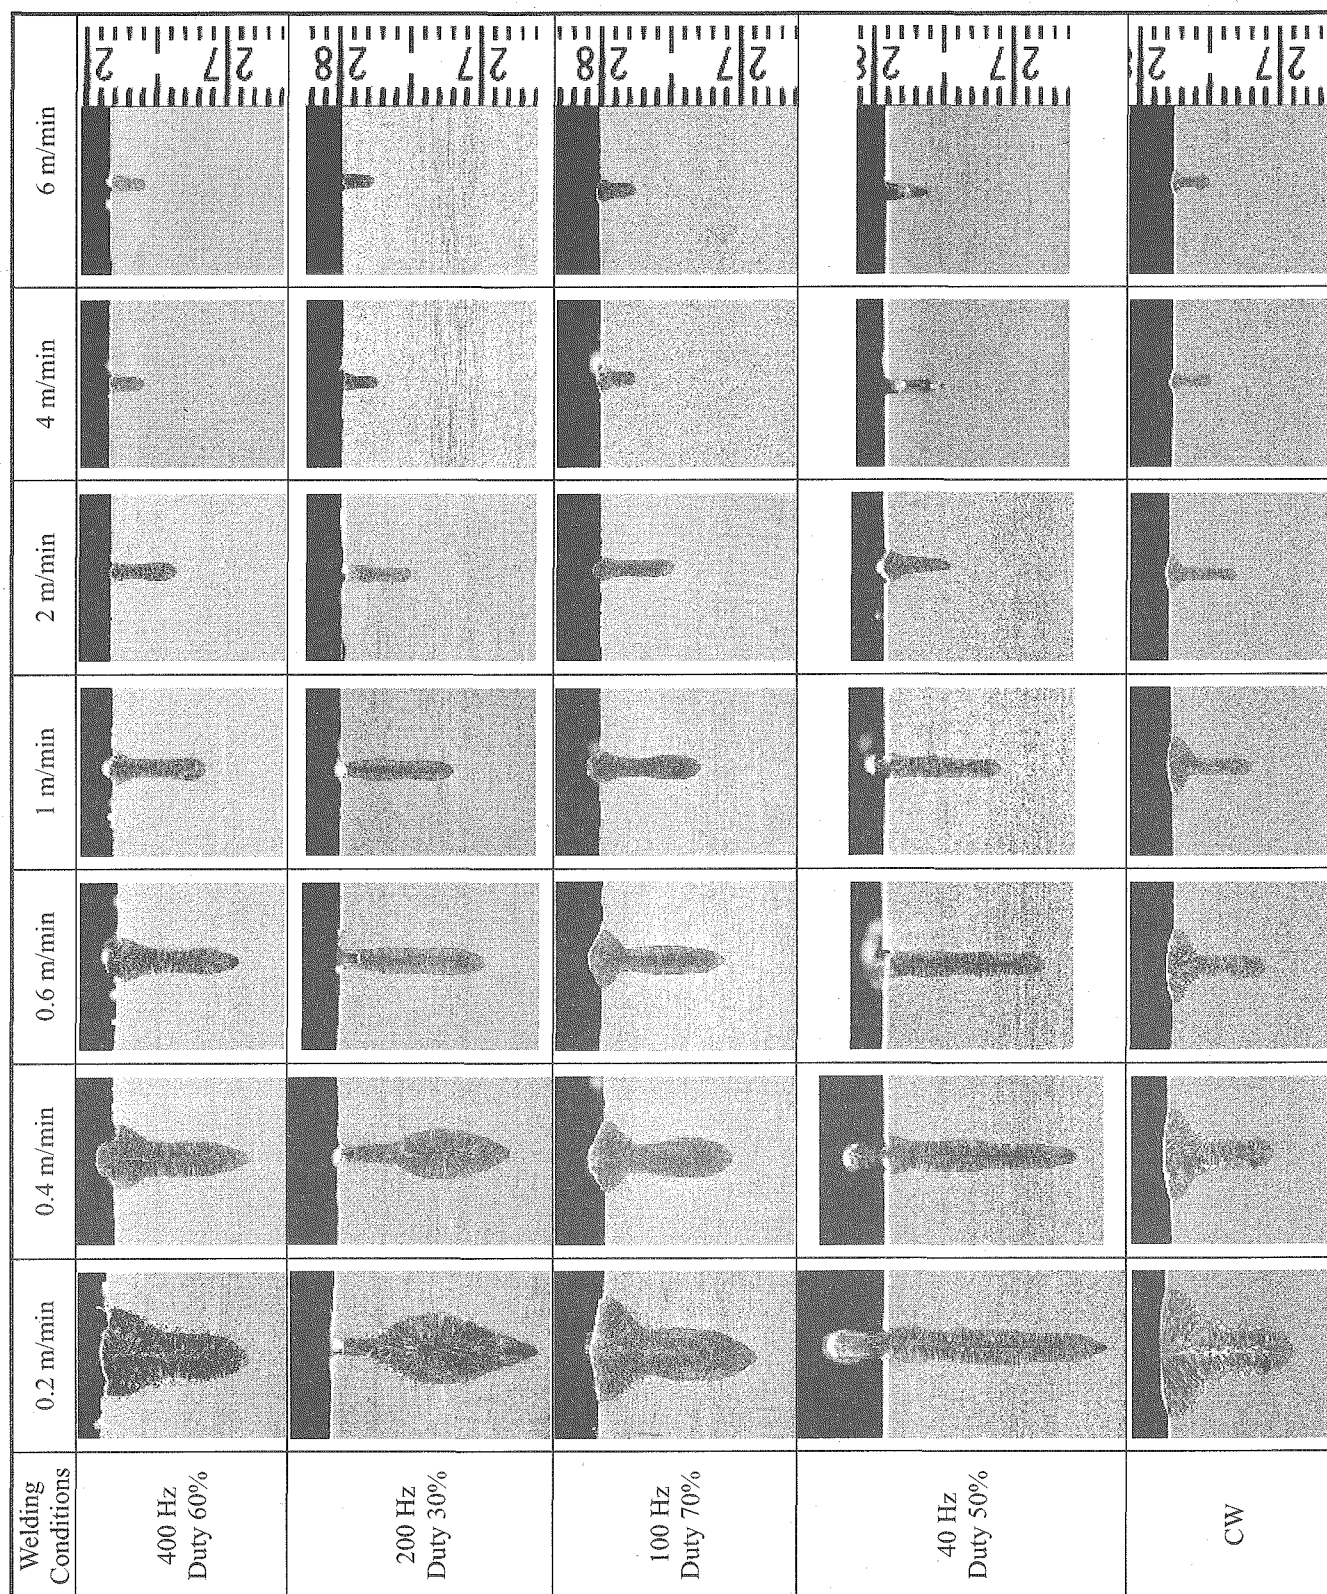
Bead cross sections in the case of bead on plate welding by YAG Laser beam (SUS304)
